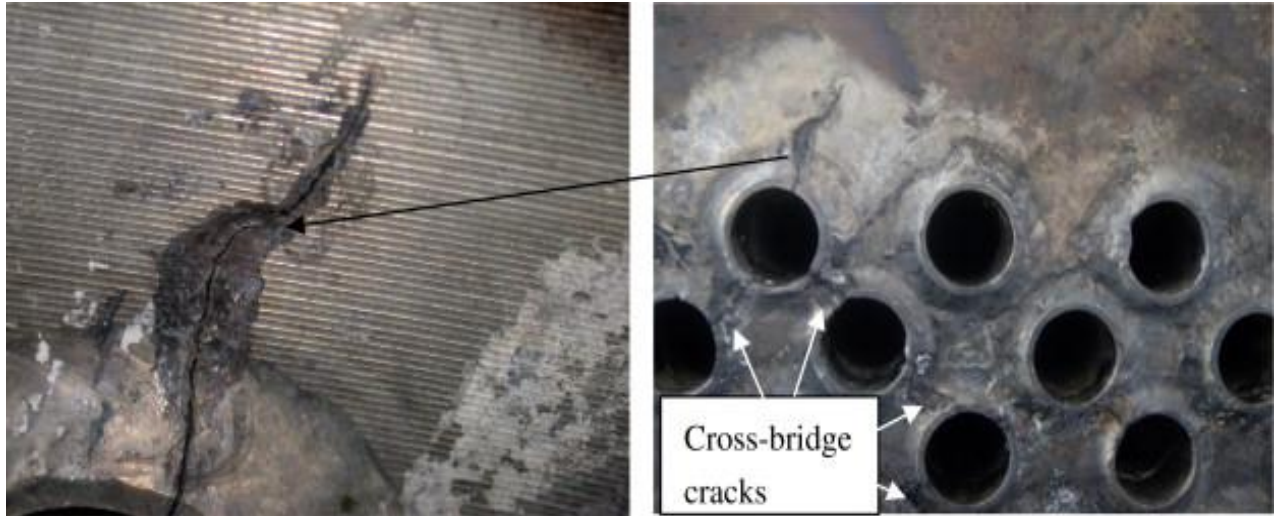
Thermal Fatigue Cracks Formed in a Heat Exchanger Tube Sheet [8]
